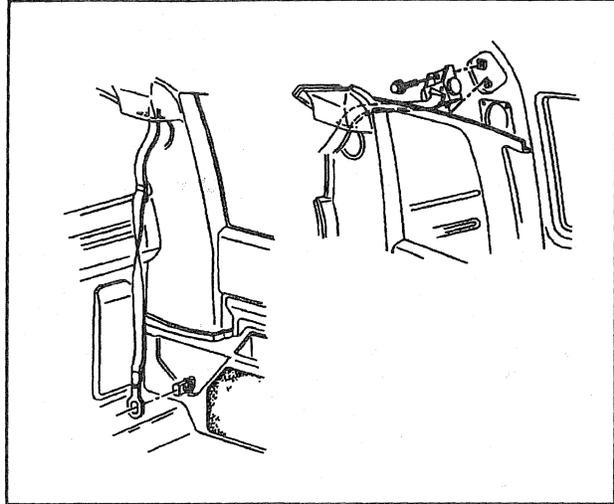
Rear Seat Belt Attachment (Crew Cab with Folding Rear Seat)
